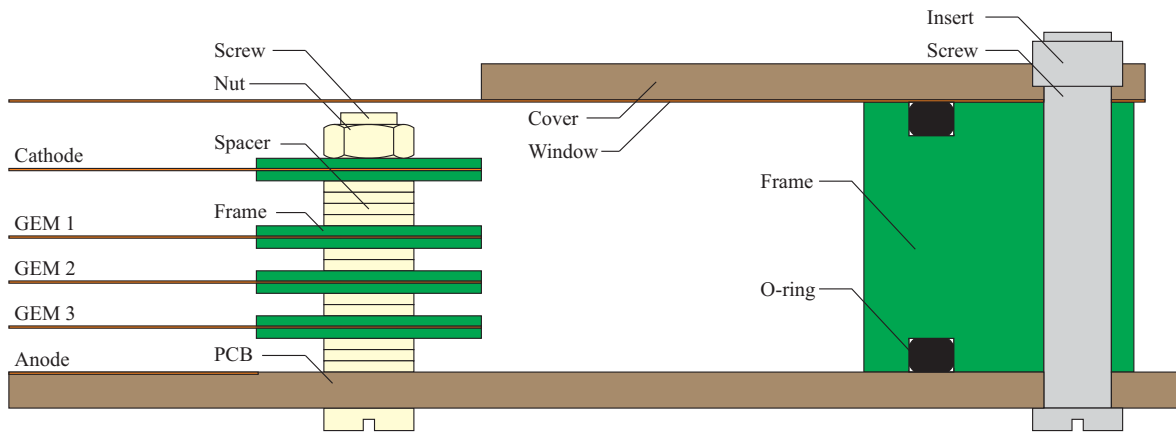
Assembly scheme of a GEM detector. For explanations see text.
